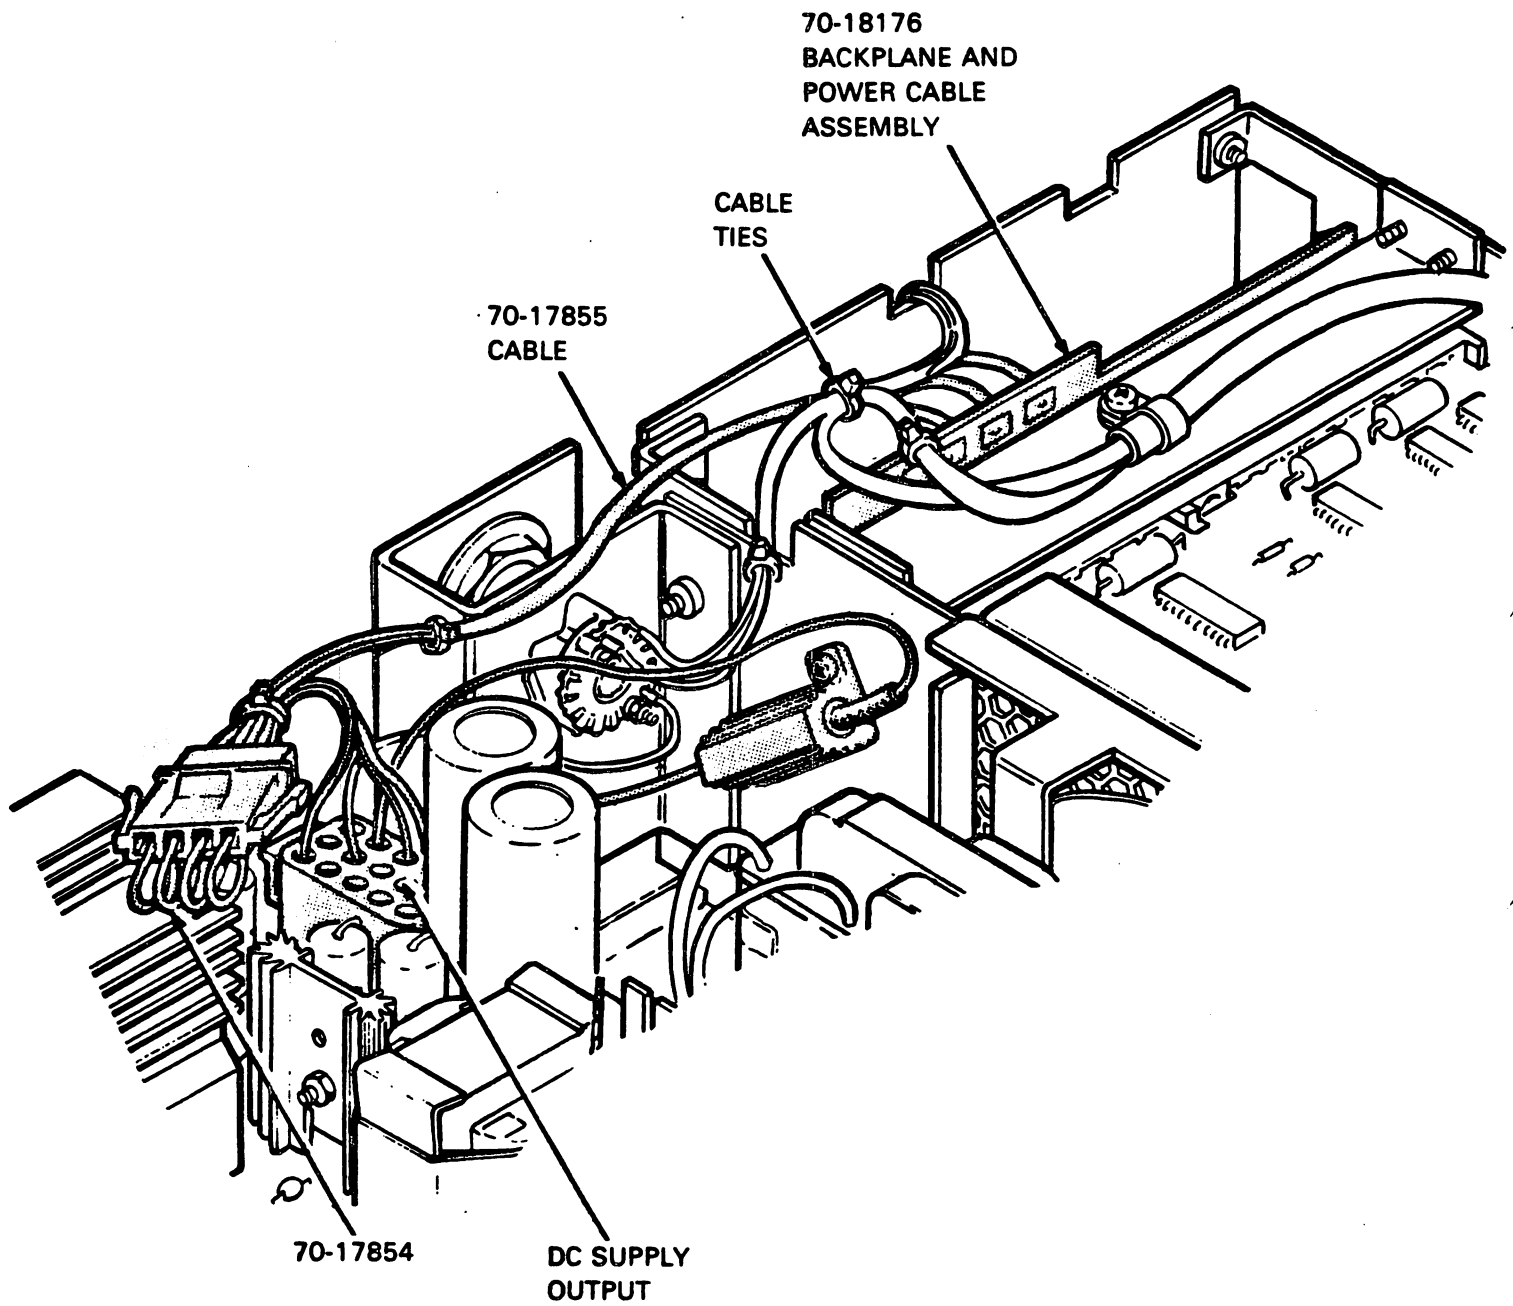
70-18176 Backplane and Power Cable Assembly
